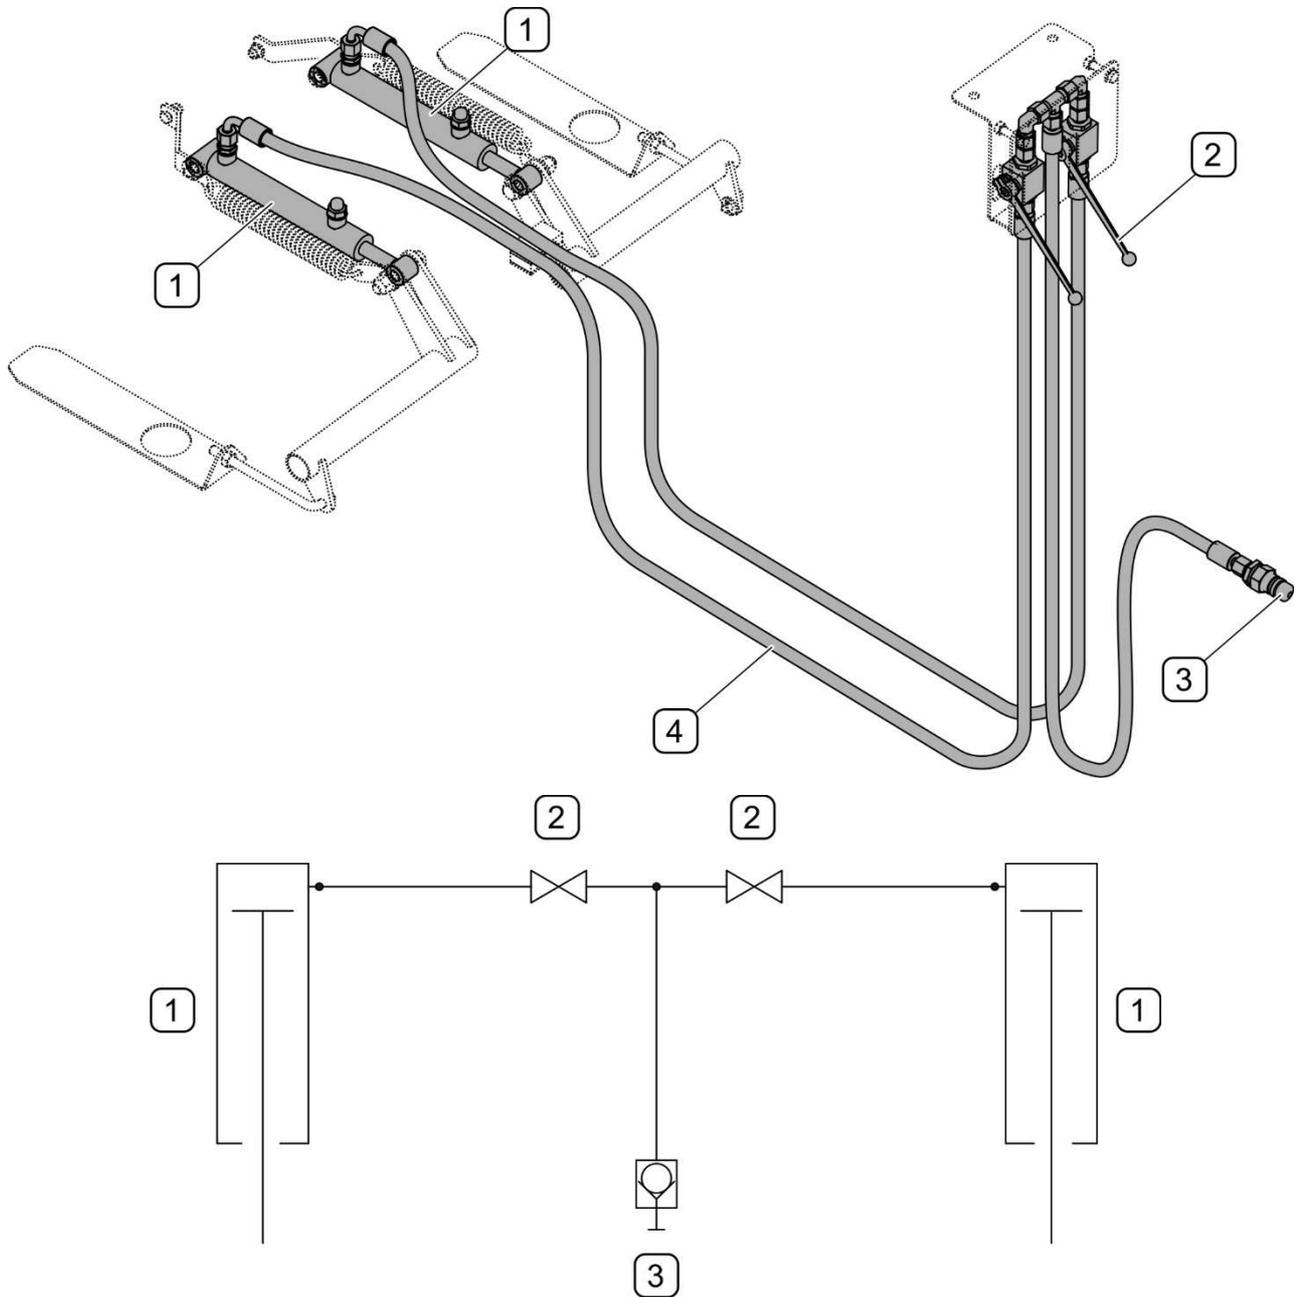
Design of dose and spreading direction adjustment mechanism
